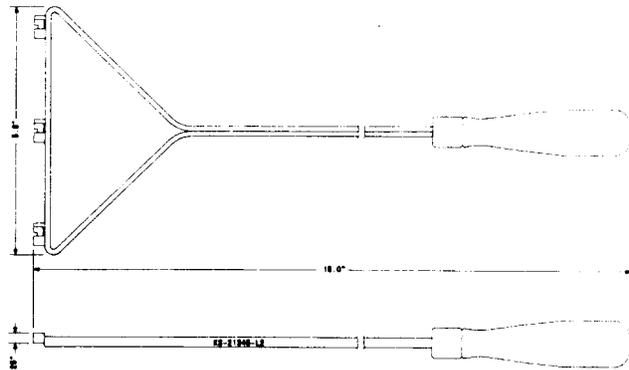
AT-8927 C Bridge Removal Tool—Front View
